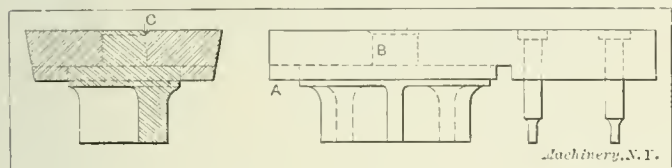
A Substantial Method of attaching a Punch to a Punch Holder
